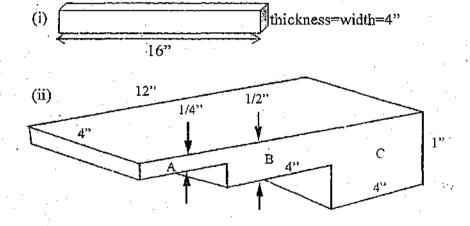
Components with dimensions in inches (i) bar and (ii) stepped component
